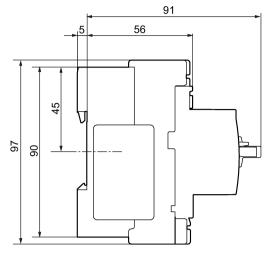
Motor starter protector with ring cable lug connection system S00/S0
